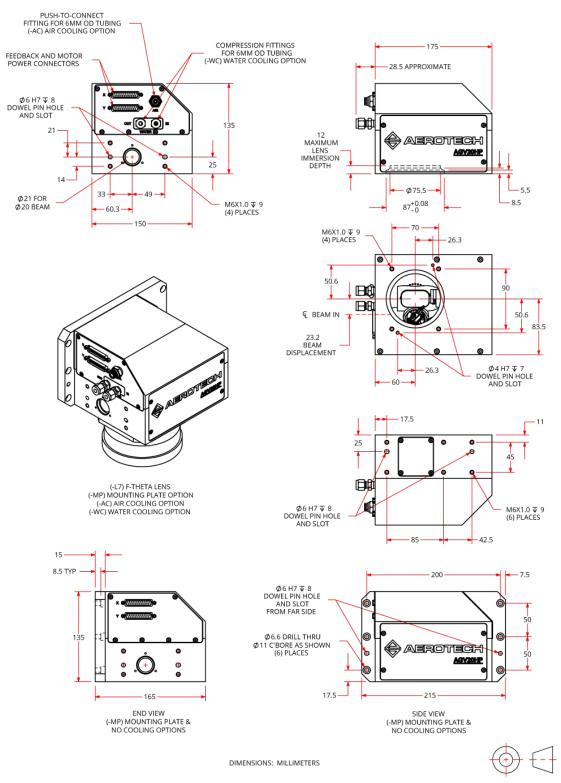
AGV20HP-BE2 Galvanometer Scanner Dimensions
